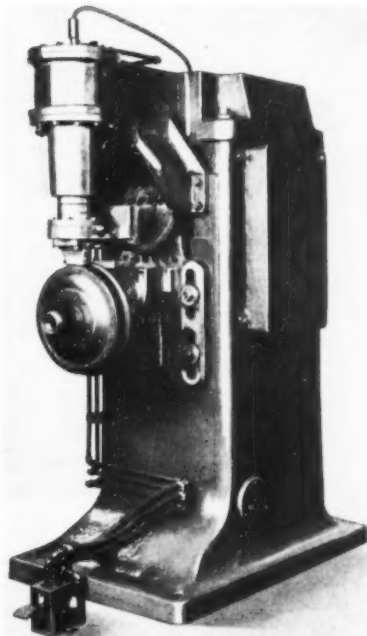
Welding Balancing Pieces to Brake-drums, Using an Automatic Weld Timer to Insure Accurate Time Control
